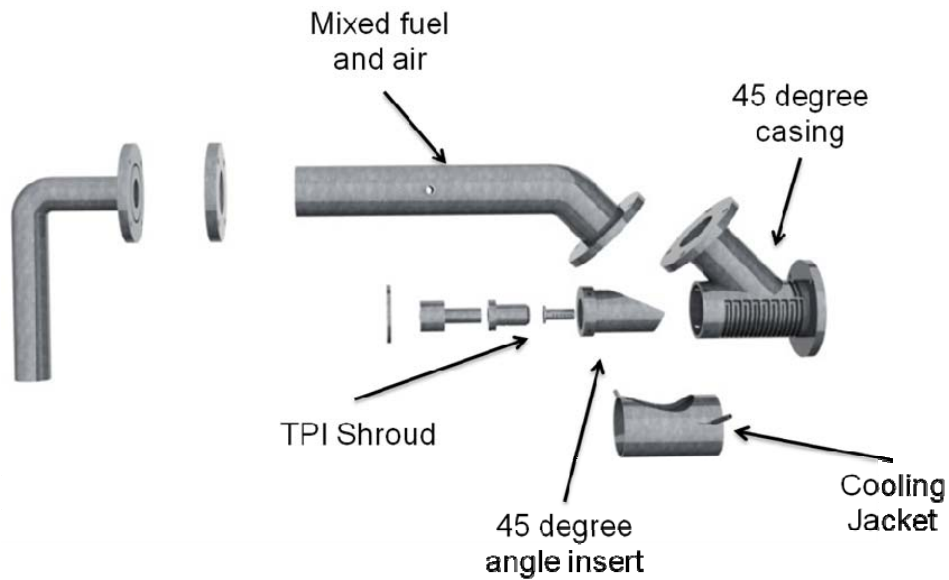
Exploded View of the Single-Inlet Arm Design Assembly
